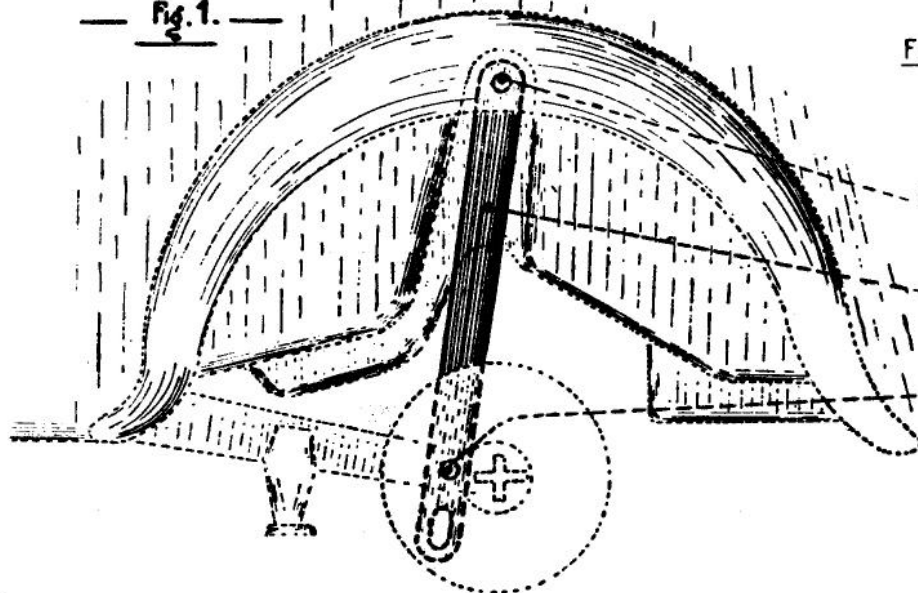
ASSEMBLY SHOWING USE OF GAUGE
